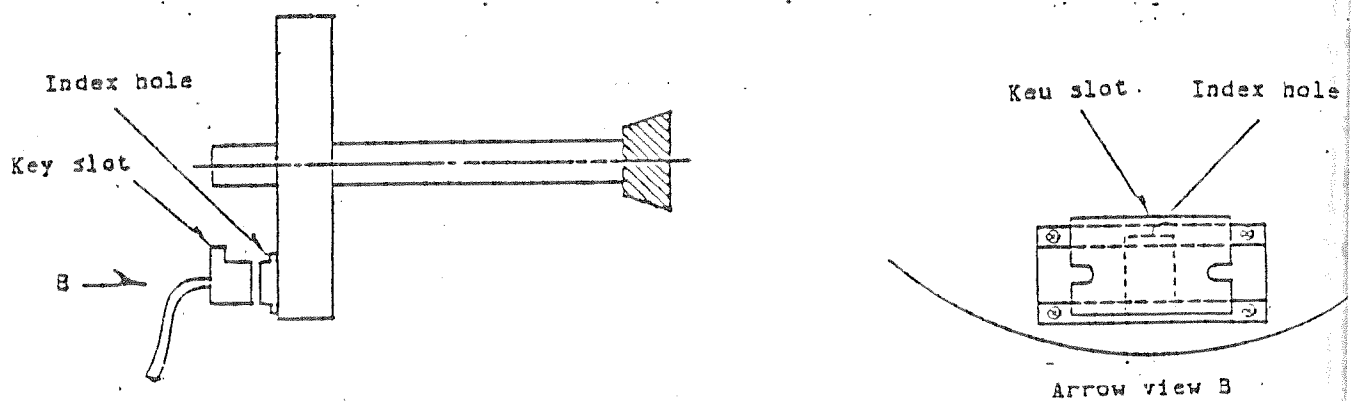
Mounting onto a flat surface on the non-load side of the rotating body
